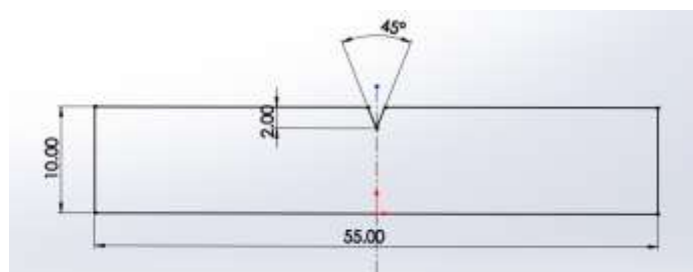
Drawing of Charpy Impact Test Specimen (Dimensions:mm) according to ASTM E23
